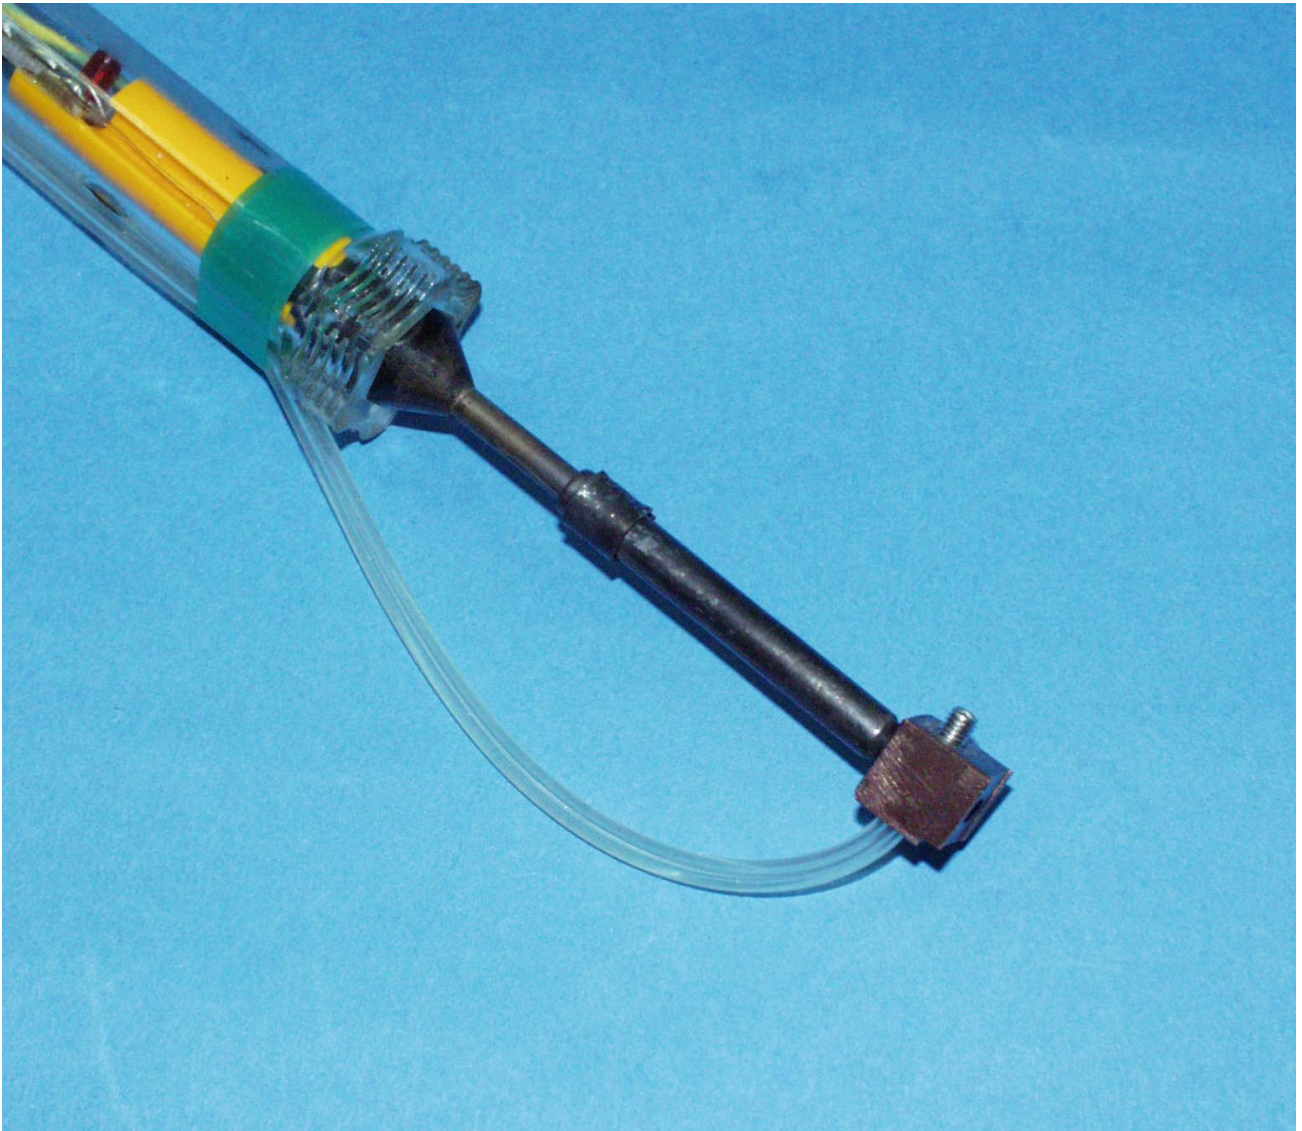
An IC heating and pick-up jig - Cu block on a soldering tip, with a vacuum line
